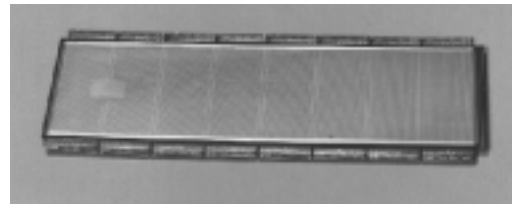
Photograph of the detector module with 16 flip chip bonded read-out chips
